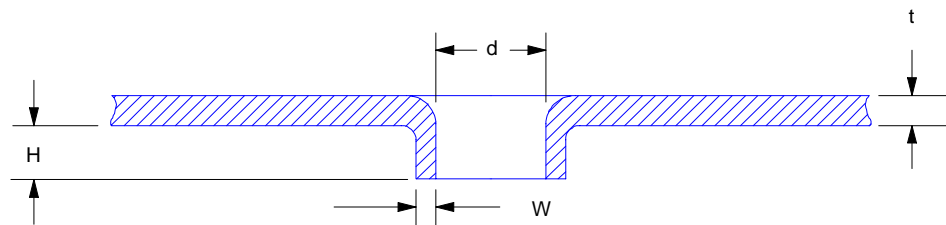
Typical thread rolling screw installation
